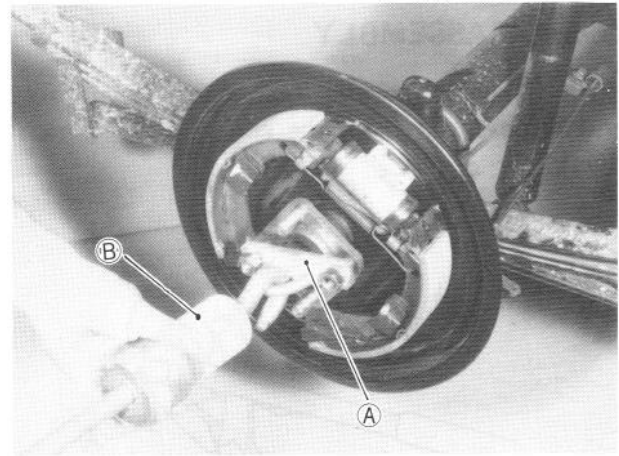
(A) Special tool (Brake drum remover 09943-355 71)
